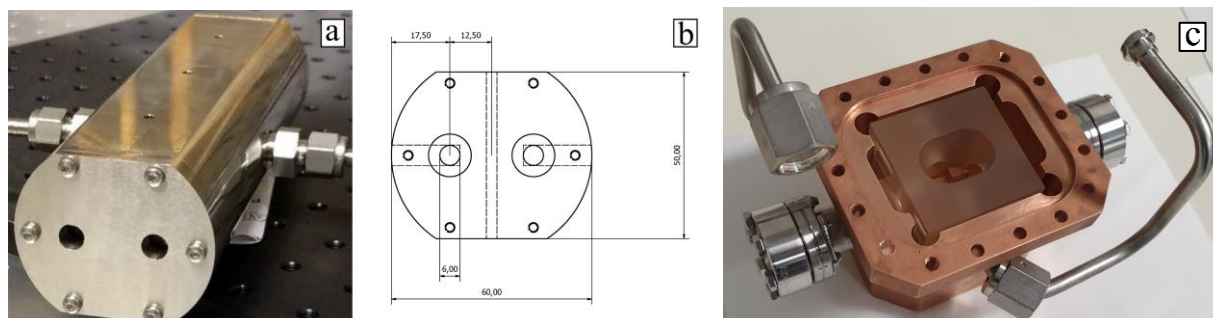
Panel (a): An Invar cavity assembly developed by UmU and RISE before being equipped with temperature probes and mounted inside an Al oven. The plates screwed into the spacer at its short ends press the mirrors, via O-rings, onto the spacer. Panel (b): A schematic drawing of the cavity assembly. Units in mm. Panels (a) and (b) are reproduced with permission from Rubin et al. [21]. Panel (c): Picture of the open refractometer at CNAM comprising a 50 mm-squared single FP resonator (with its two silica mirrors and a spacer made in Zerodur) residing inside the copper enclosure<sup>1</sup>.
